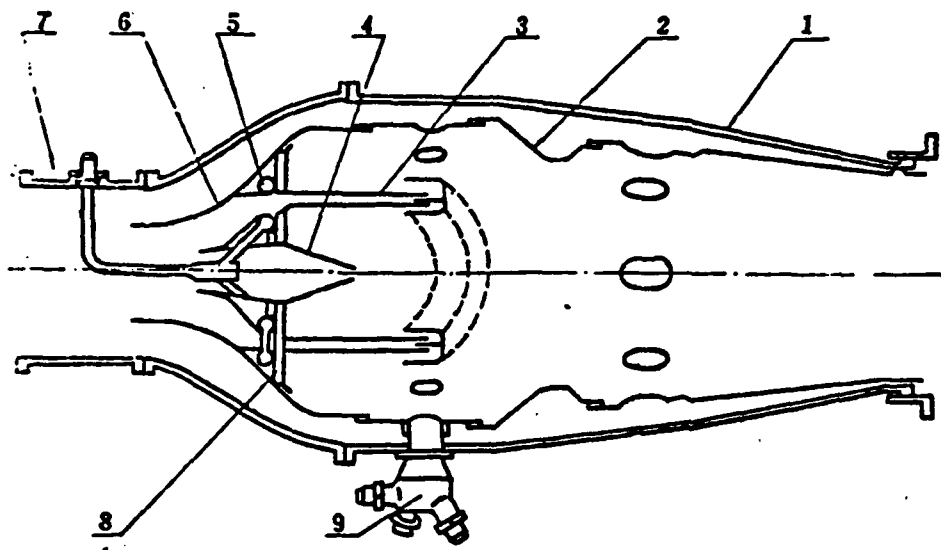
Oil film vaporizing single tube combustor with double combustion spaces.
